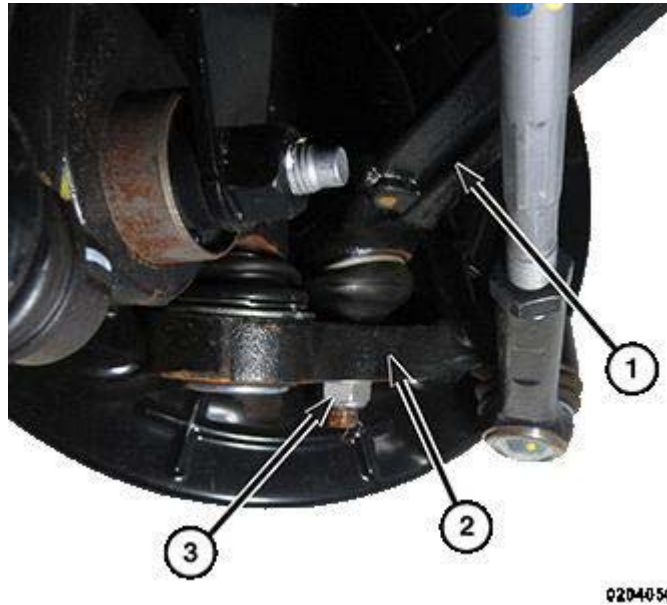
Knuckle & Tension Strut To Knuckle Nut
